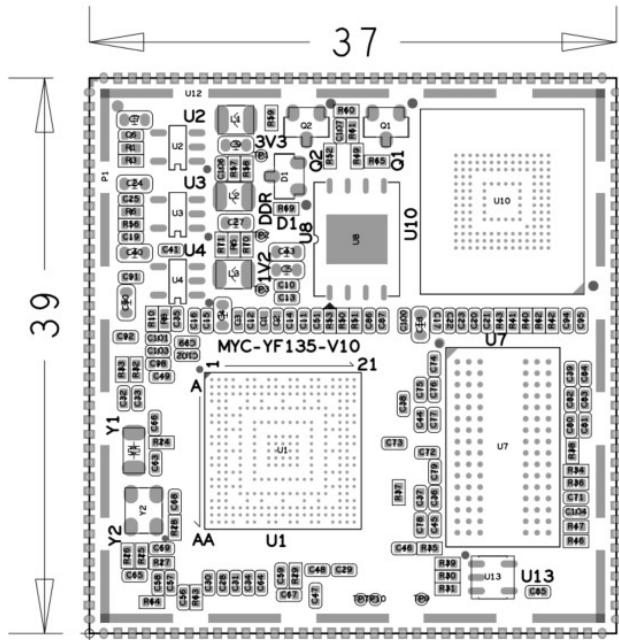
Mechanical Structure of MYC-YF13X Core board (Unit: mm)
